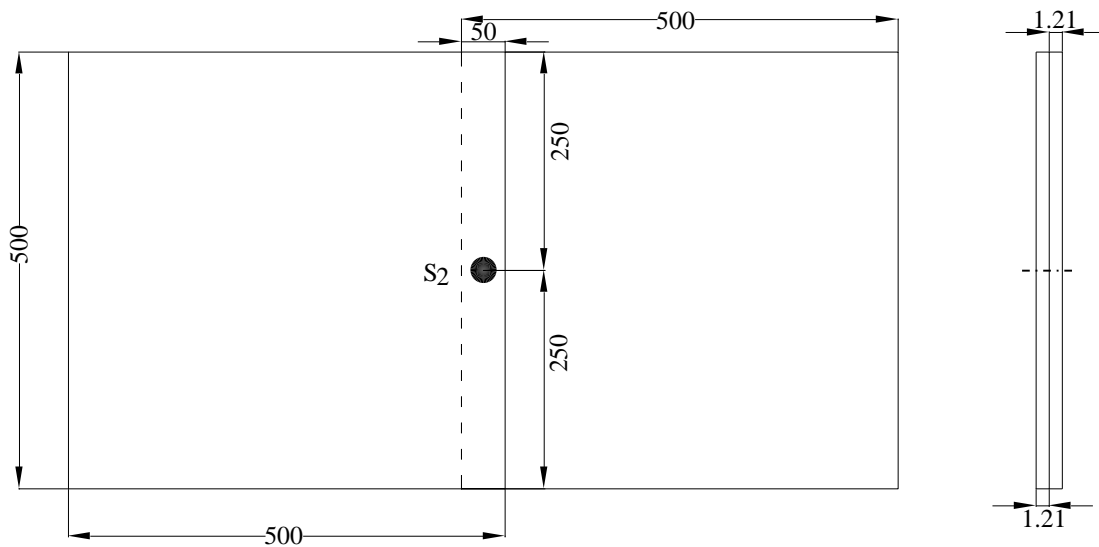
Geometric dimensions of plates with spot- welds (Case-4)
